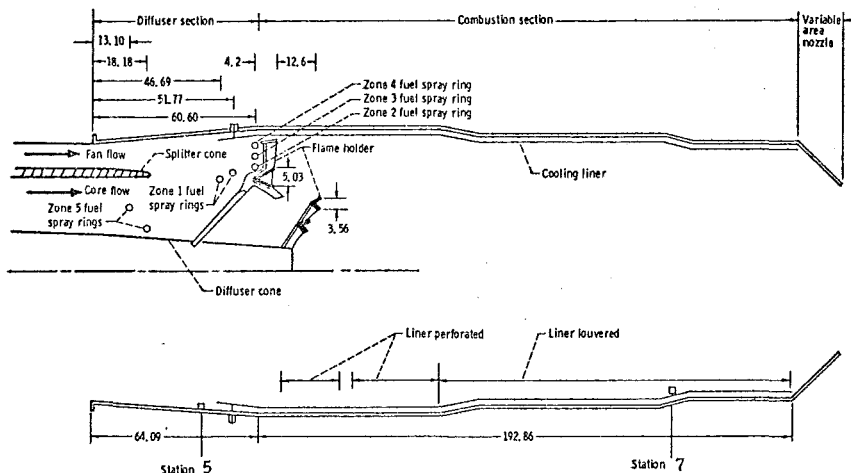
Sketch of Afterburner for TF30-P-3 Augmented Turbofan Engine.
